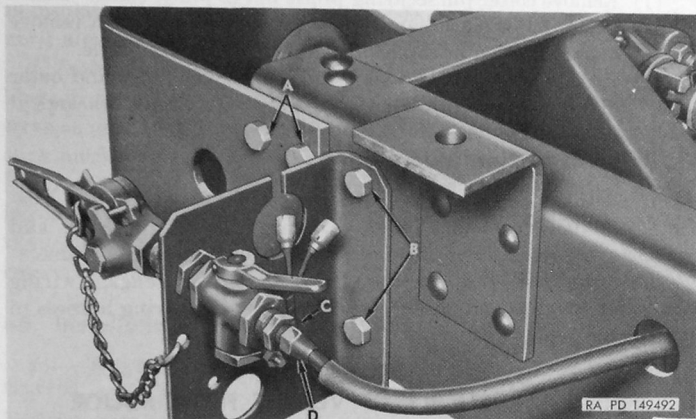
Right trailer air connection and tail light bracket disconnect points.
